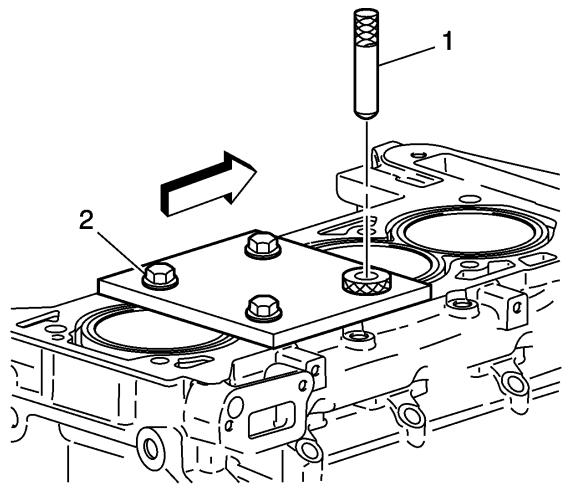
Alignment Pin Courtesy of GENERAL MOTORS COMPANY
